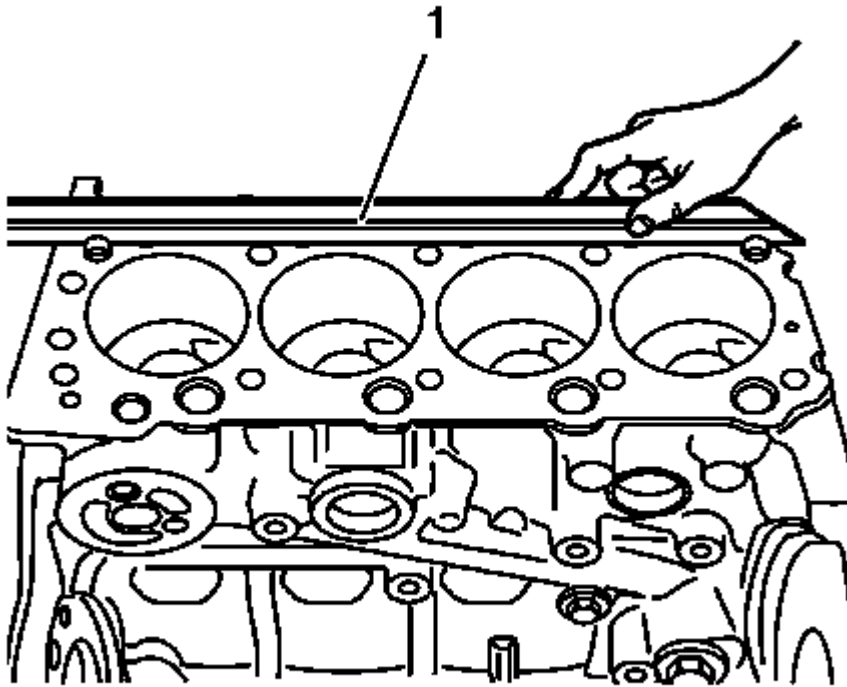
Inspecting Engine Block For Deflection Using Straight Edge
